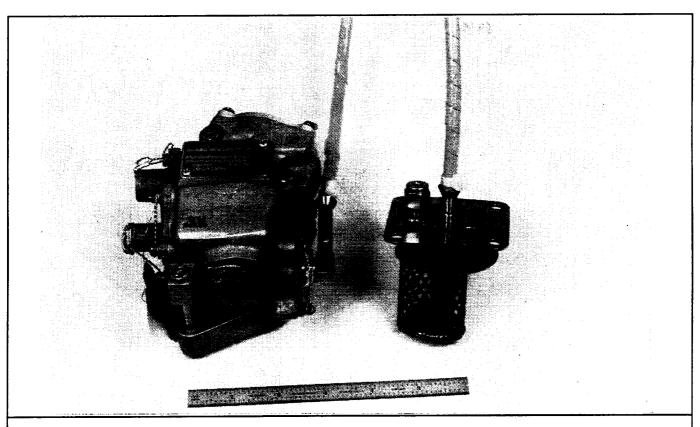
Modified F404 CIT Transmitter For Fiber Optic T2.5 Probe Installation
